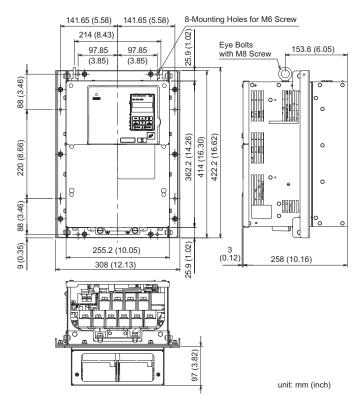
Dimensions (CIMR-A□4T0058U)
